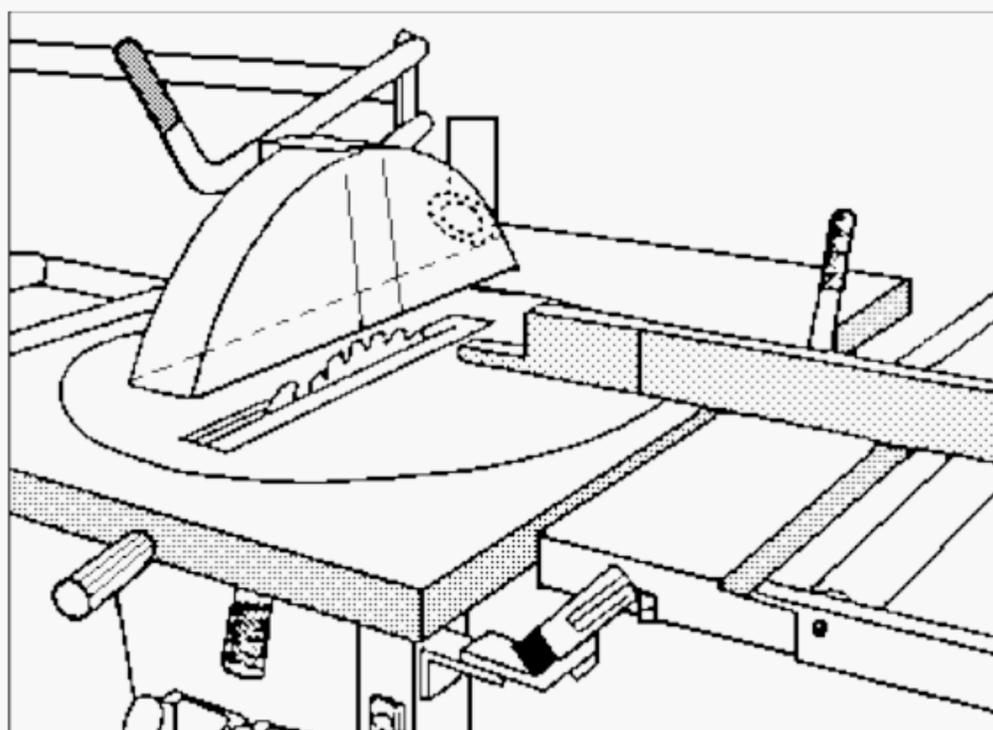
Example of a machine in the cross-cutting mode with moved workpiece
